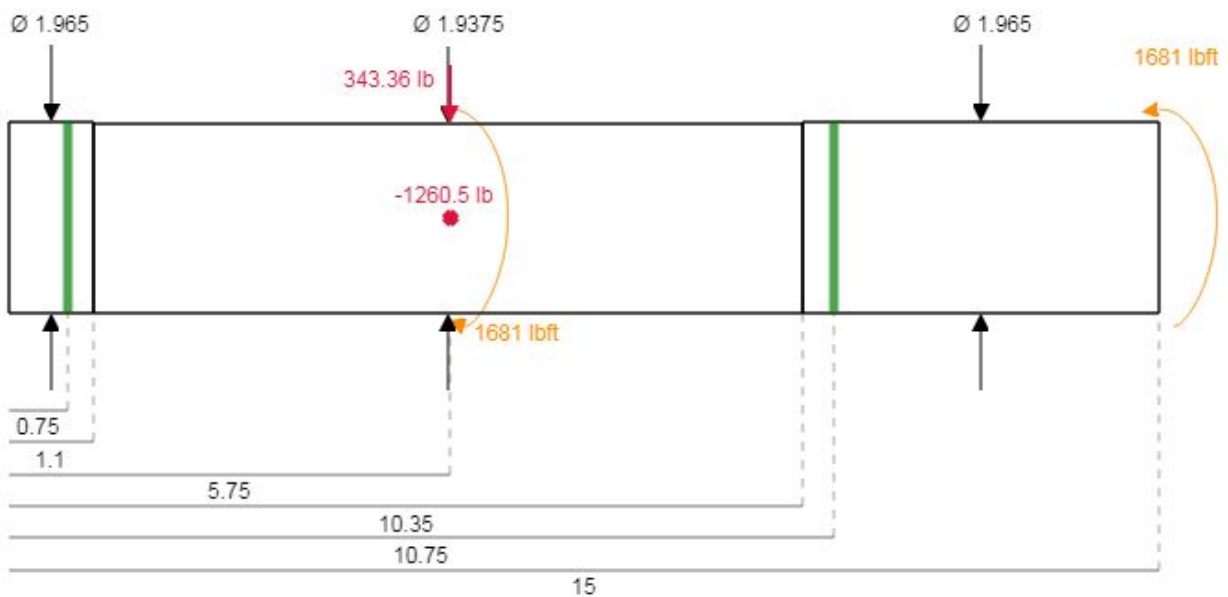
SkyCiv-generated FBD of Shaft EF (All Dimensions in Inches and Bearing Centerlines Identified in Green)
